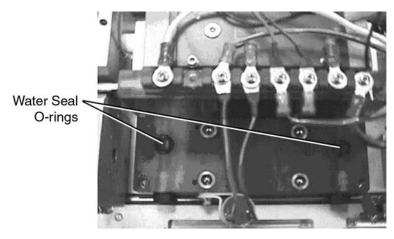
Pump Chamber Water Seal O-Rings for Solo 120 and IV
